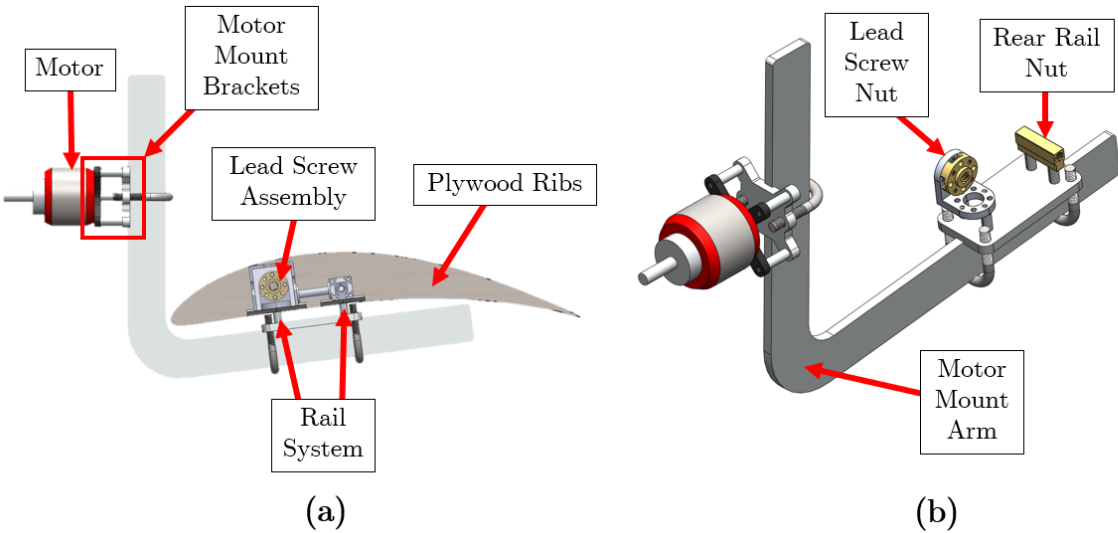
(a) Cross-section view and (b) isometric view of our rig design illustrating the wing structure and integrated lead screw mechanism.
